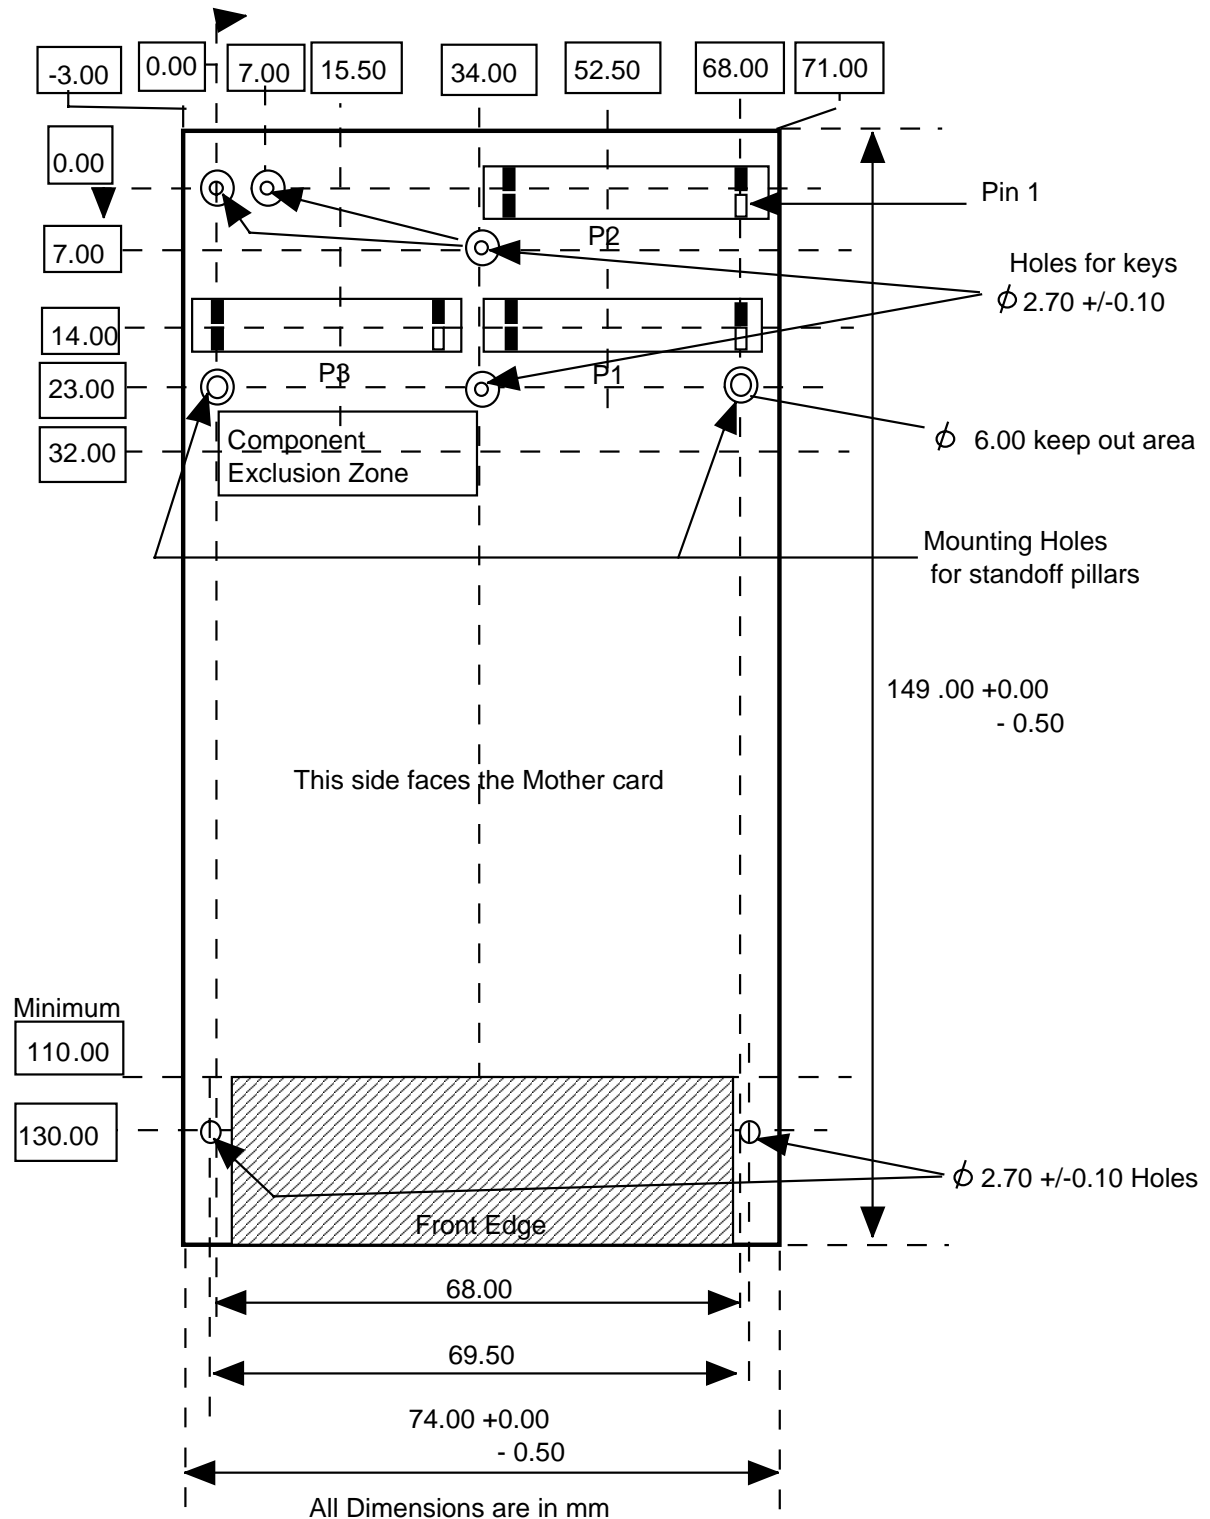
Dimensions for the CMC Daughter boards (not to scale)
